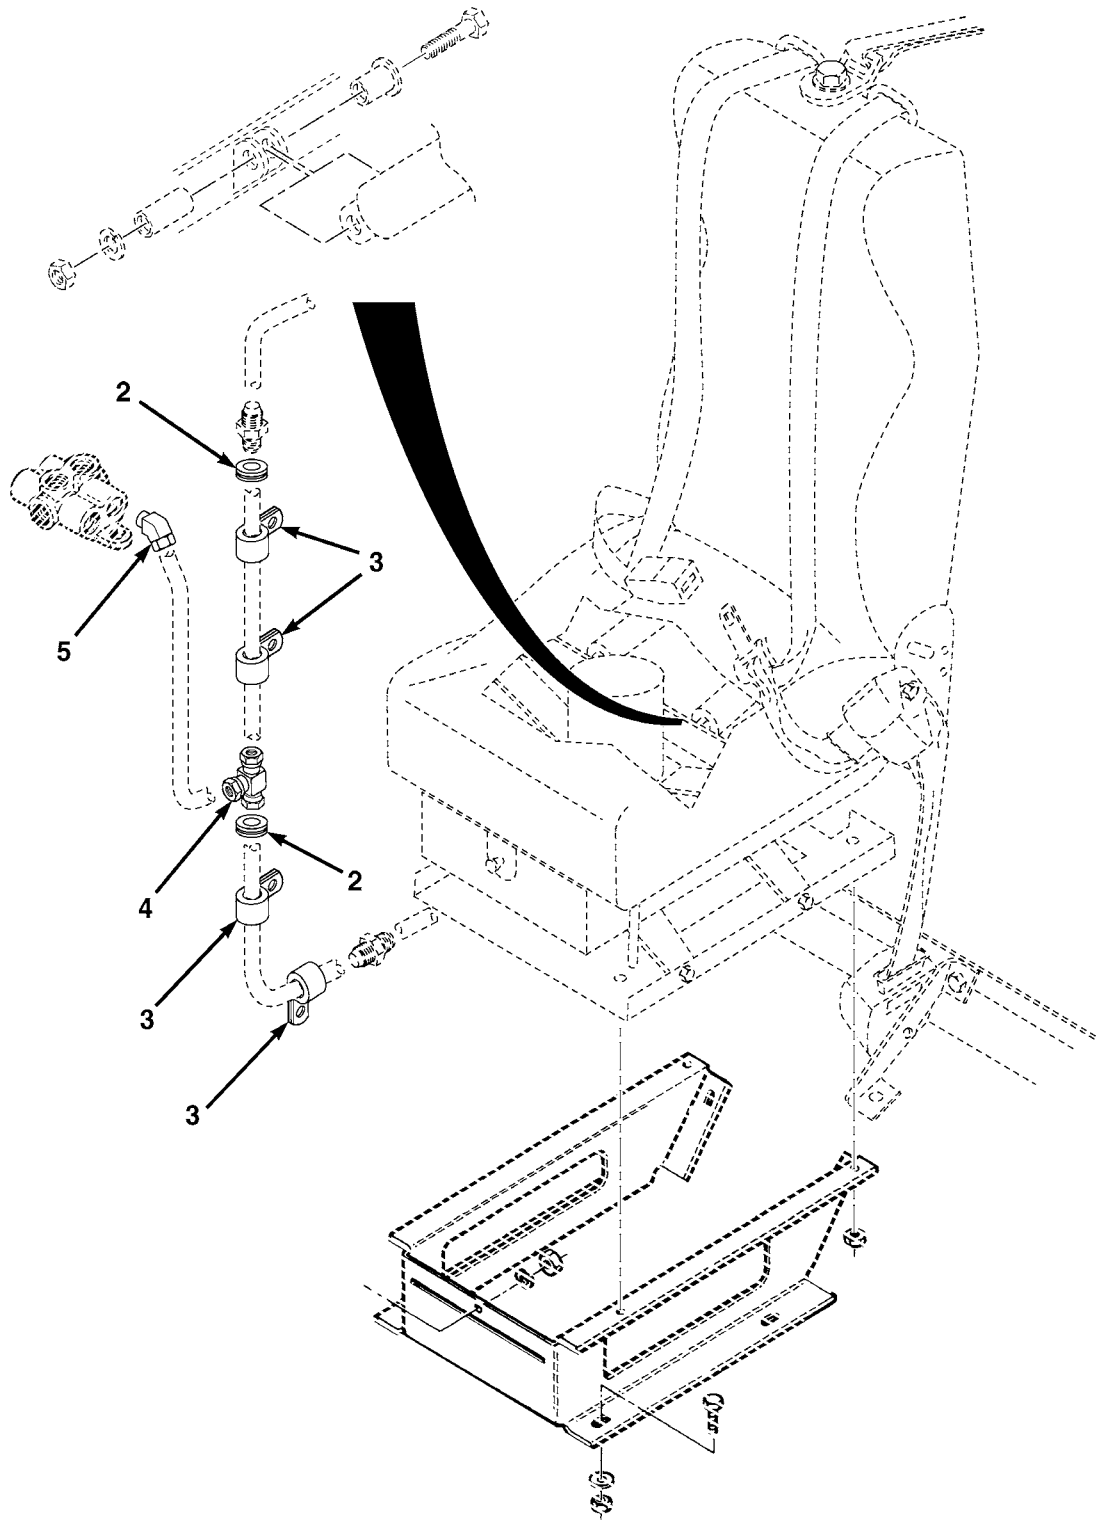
SEAT BELT ASSEMBLY (SHEET 2 OF 3)
